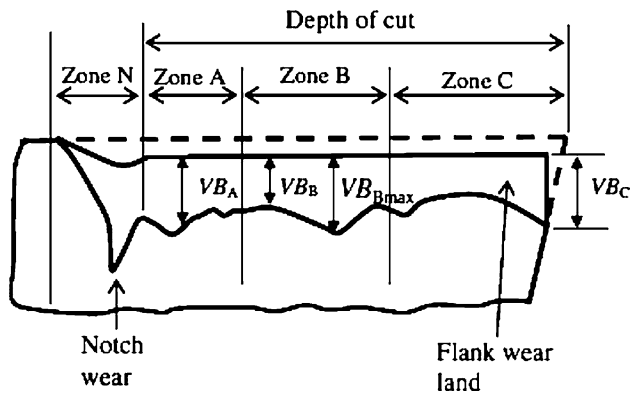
Side view of cutting tool showing flank wear (ISO3685)
